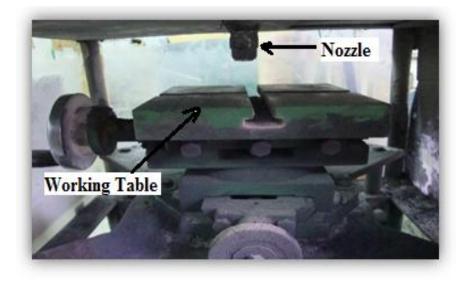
The working table and Nozzle of Abrasive Jet Machine, Metal forming lab Department Of Mechanical Engg. DTU
